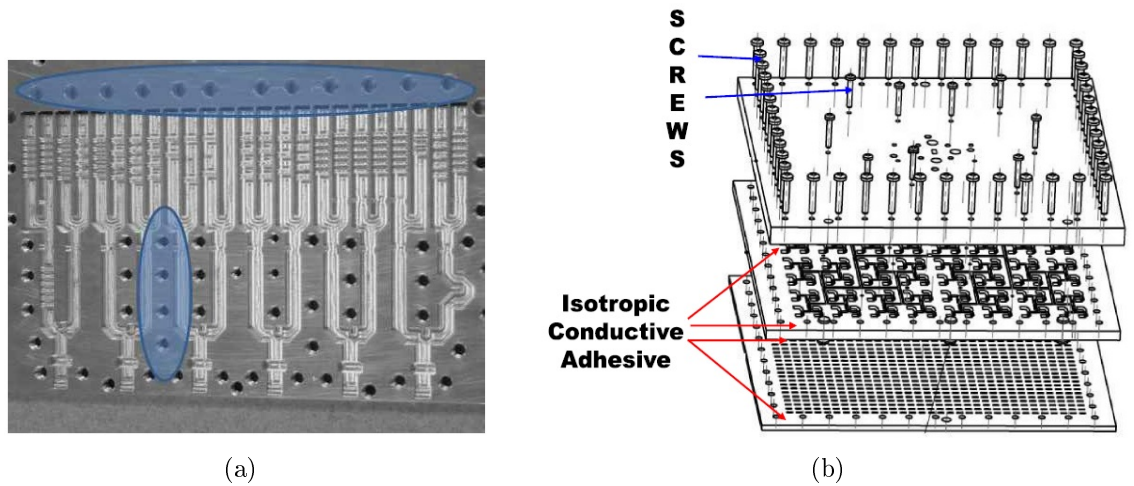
(a) The configuration of assembly method with many screws for a series-fed array antenna. (b) The configuration of assembly method with many screws for a full corporate-fed array antenna. Source: [50].
